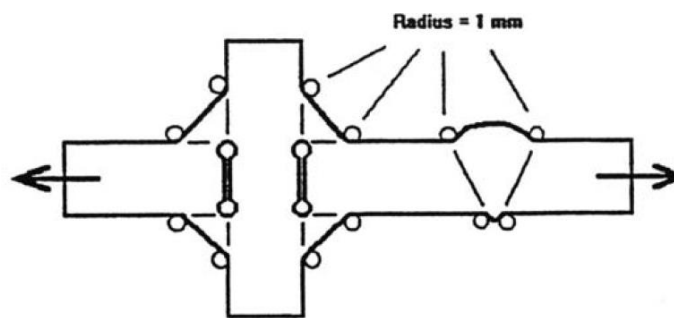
1 mm radius applied in weld notches [17]
